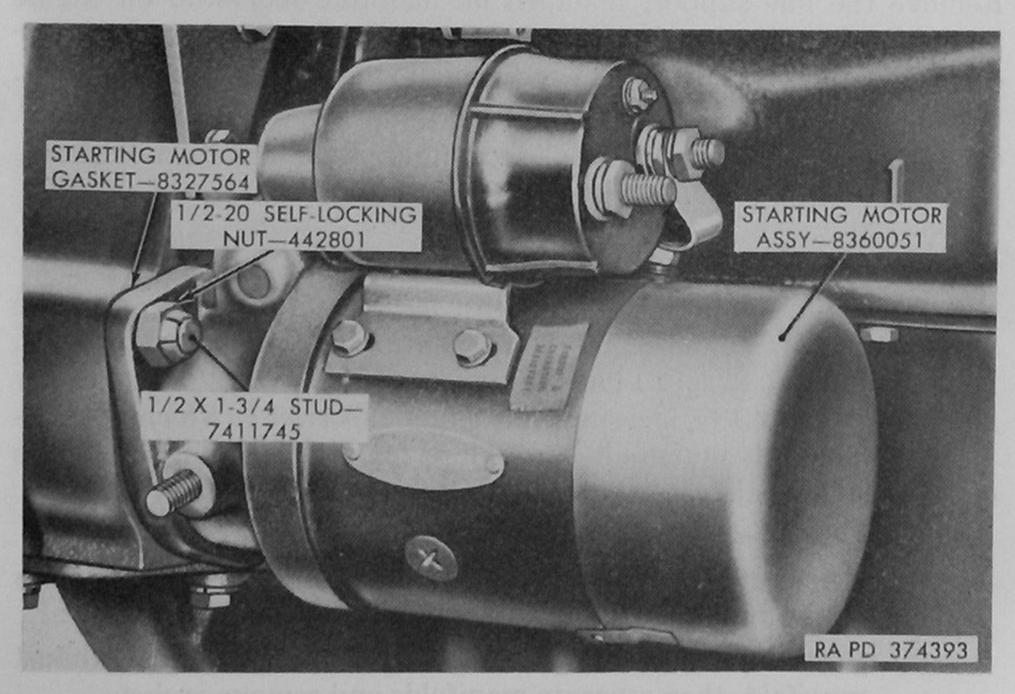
Starting motor assembly installed—engine assembly 8329440.
